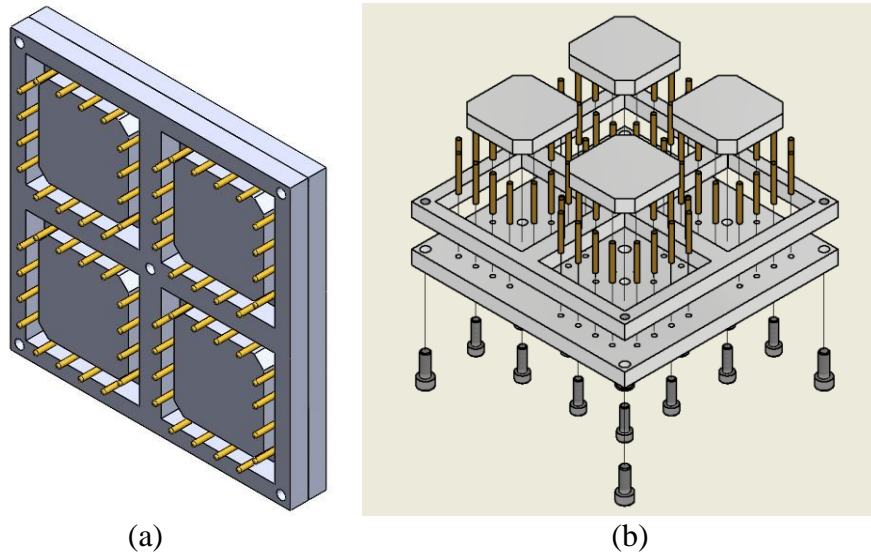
(a) Isometric CAD view of the mold (b) Exploded CAD view of the mold showing each component.
